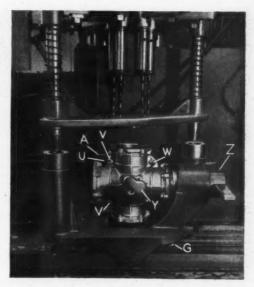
The trailing jig of the pair used for drilling and tapping meter bodies. This jig provides for holding the body while holes are machined in each cylinder head flange, also at an angular setting between two cylinder positions
